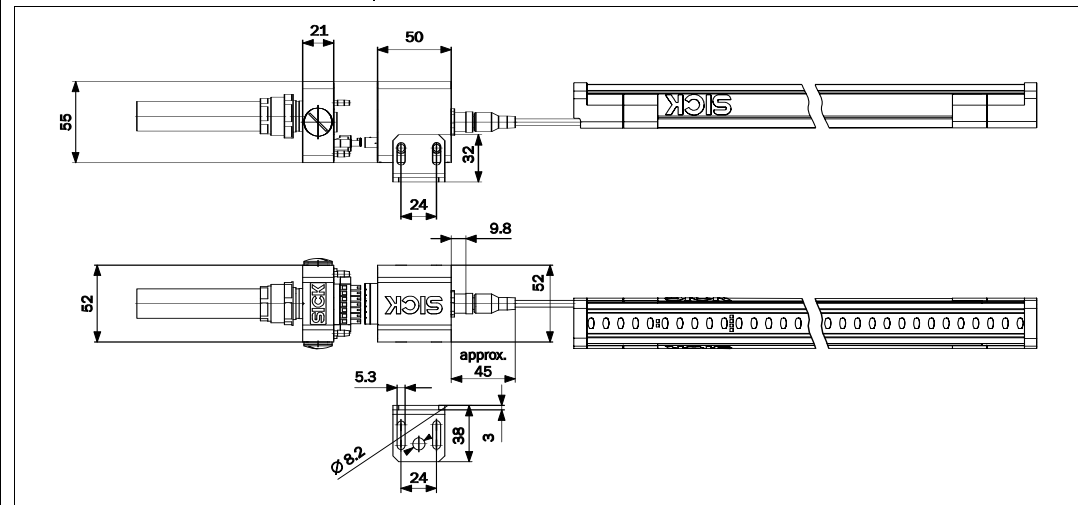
Dimensional drawing Adapter FGS/deTec4 with FGS terminal compartment and deTec4 Core safety light curtain (mm)
